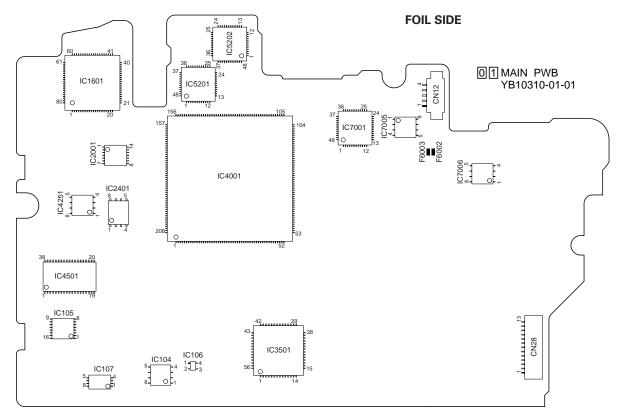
FUSE location for MAIN board assembly (FOIL SIDE)
